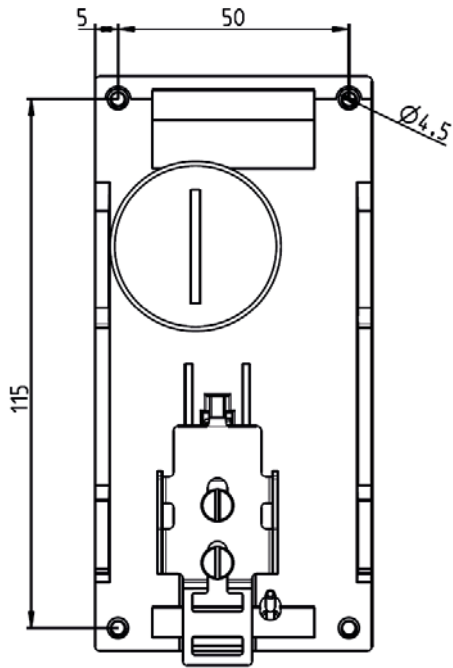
Small design dimension drawing (IE Switch X-306)
